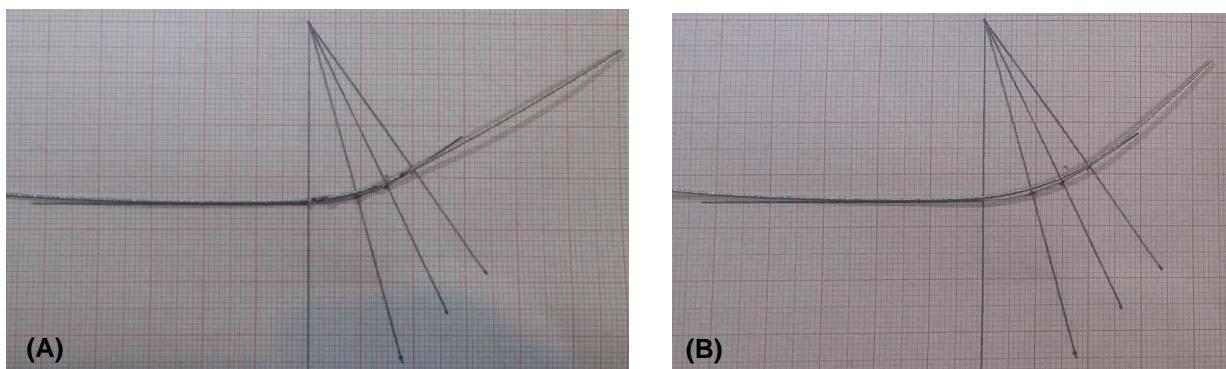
(A) Soldered wire rope remaining in a 35° angle and 35mm radius shape after being released from the mold. (B) Plastically deformed wire rope after bending 180° over a 10mm radius. Both follow the expected curve close.
